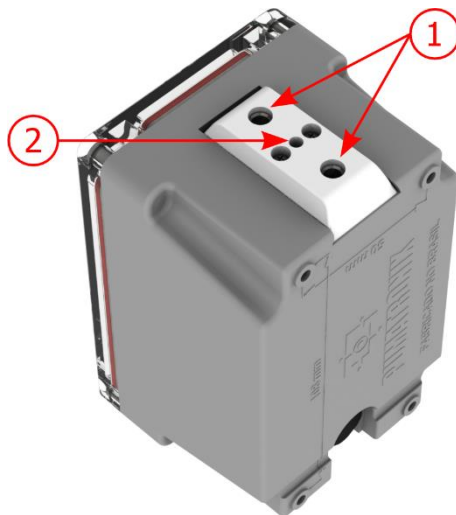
Attachment Mechanism Position in ITSLUX: 1) Thread for screws 1/4"; 2) Ø4mm hole for pin fixing guide
